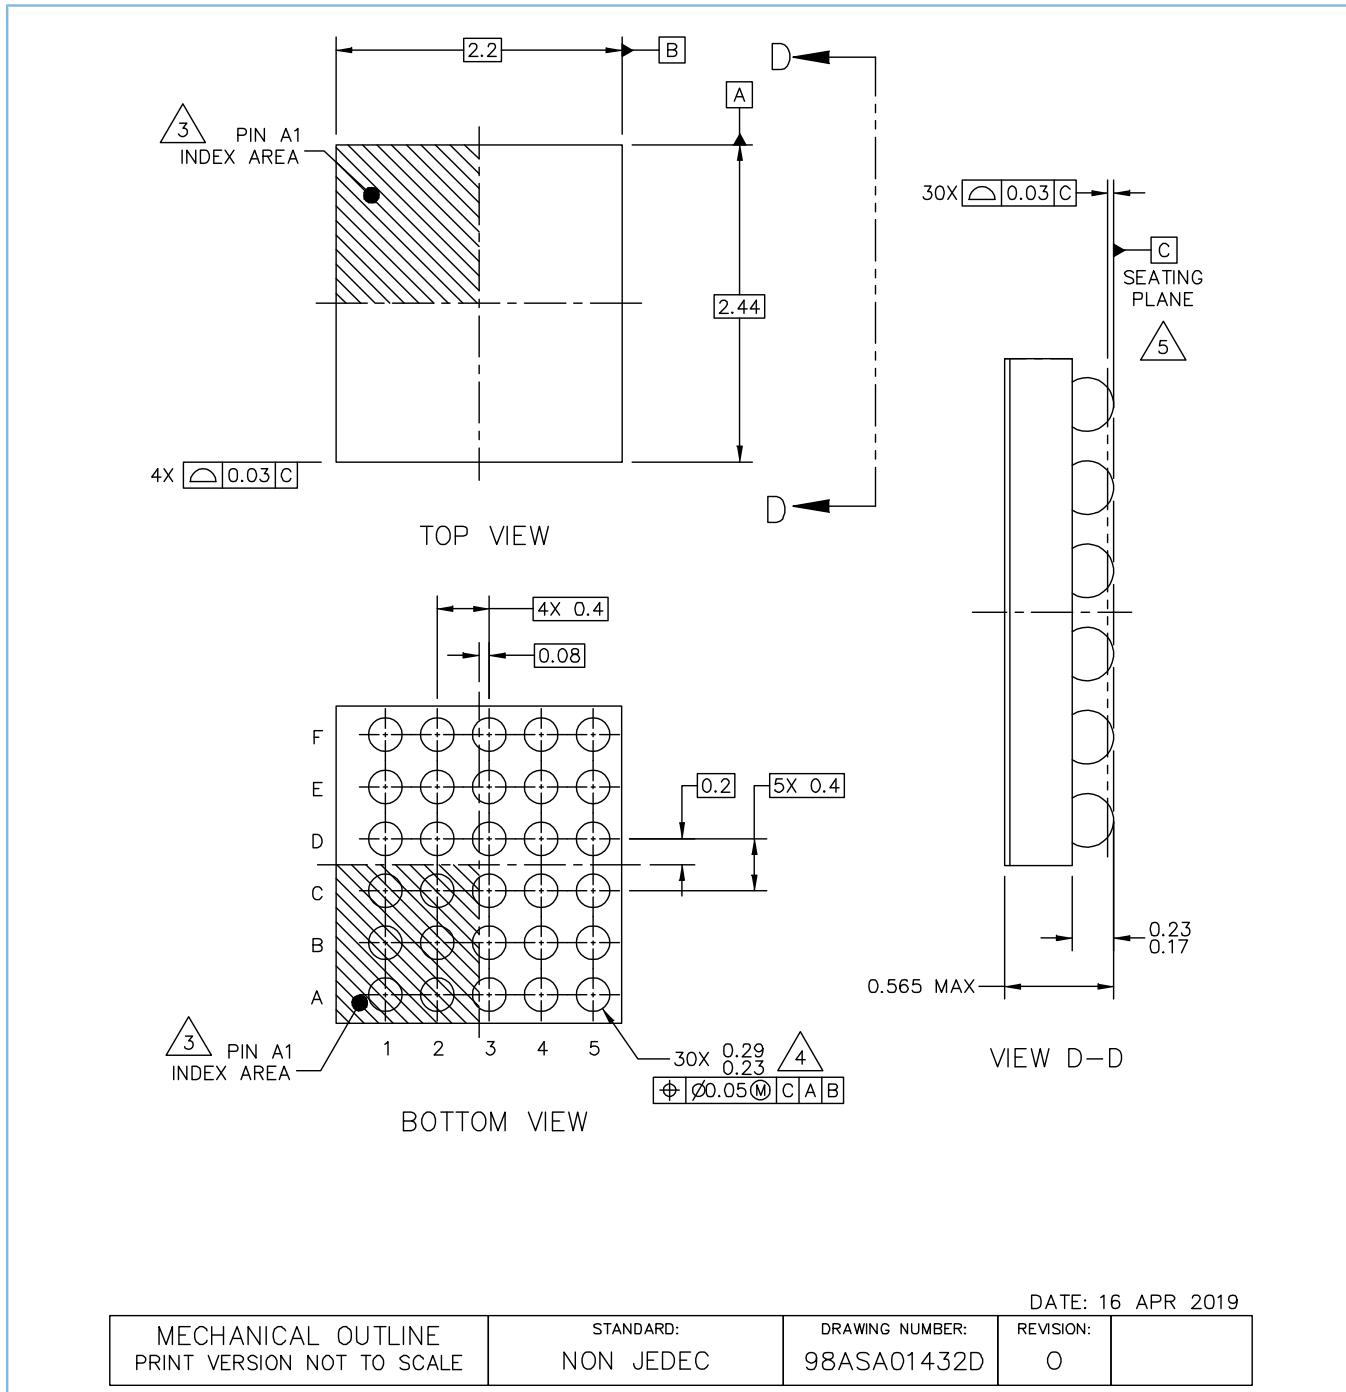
Package outline WLCSP30 (SOT1443-7); without back side coating
